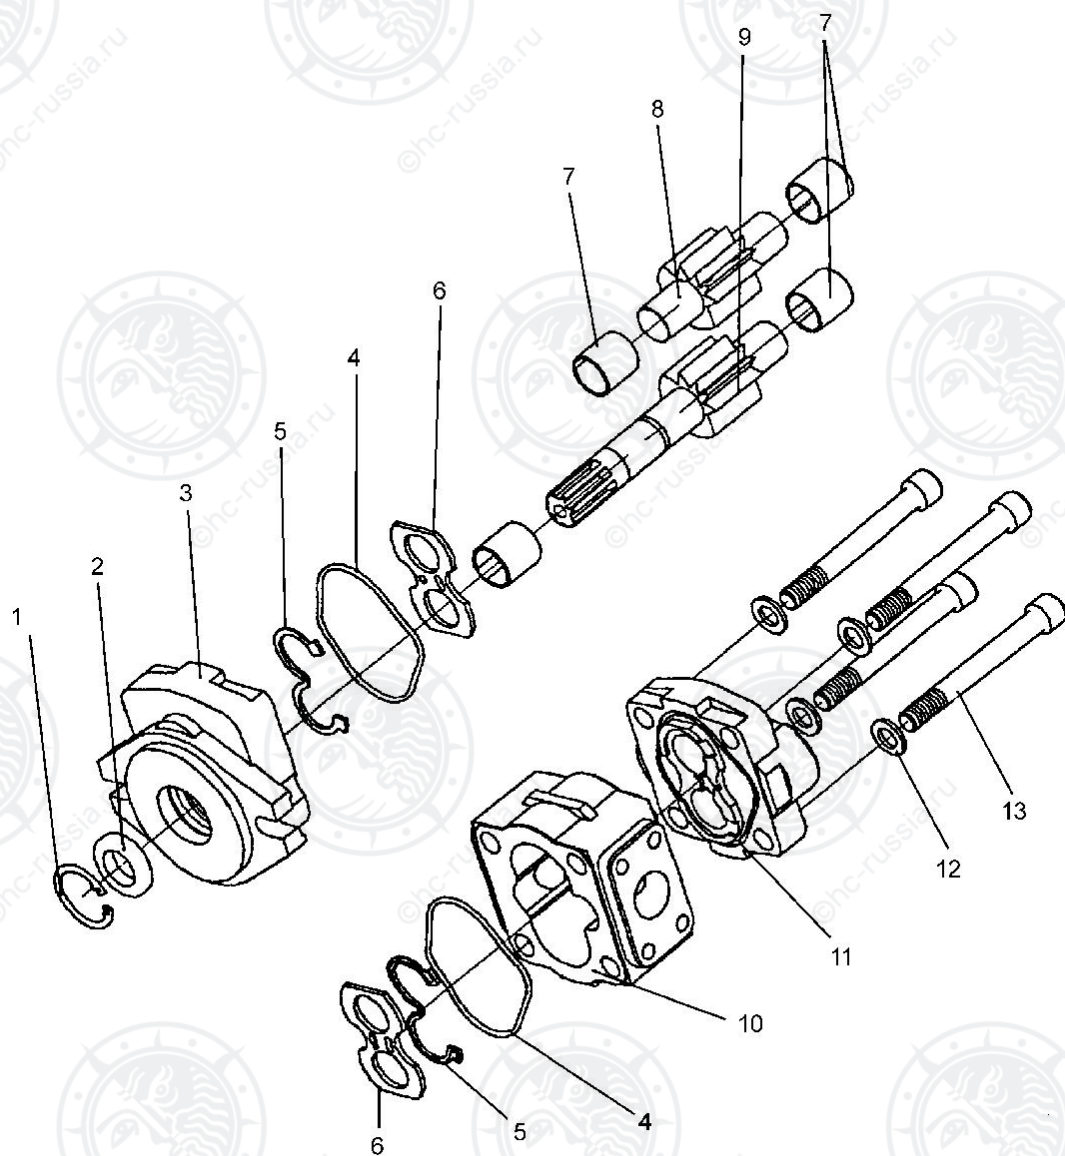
CBHZG clockwise (Right) rotation gear pump
